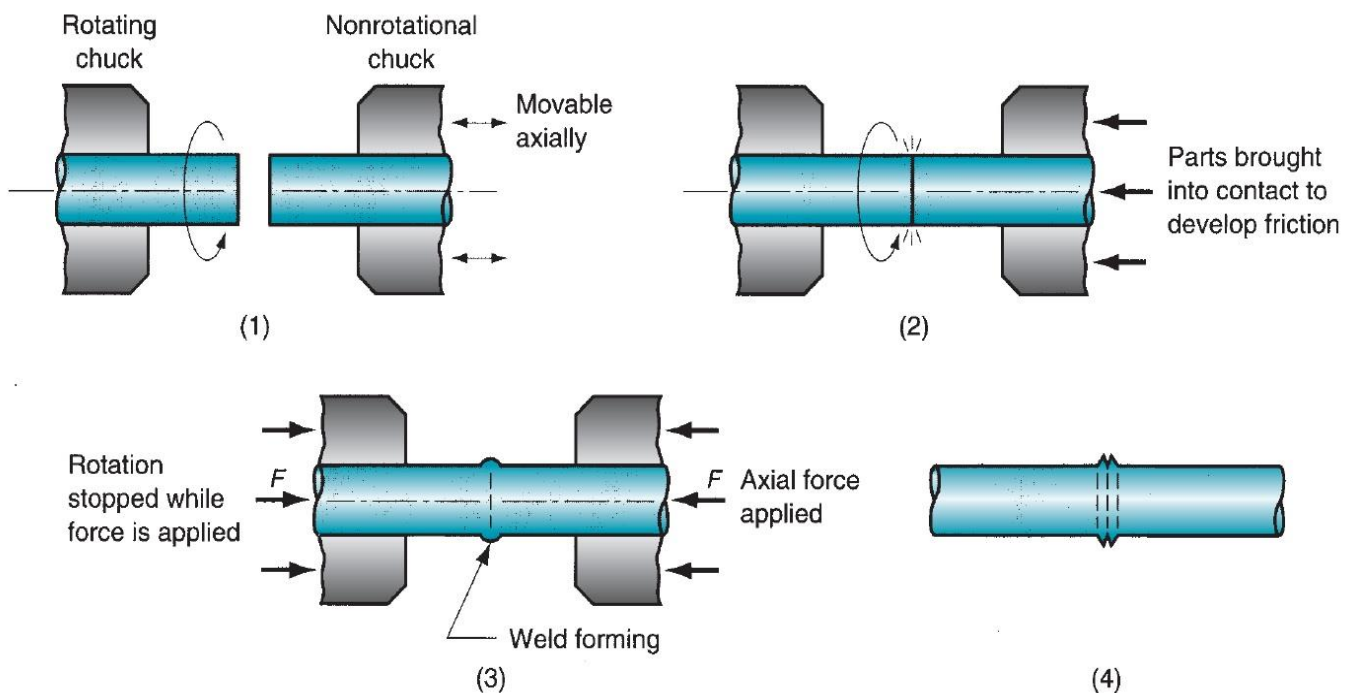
Friction welding (FRW): (1) rotating part, no contact; (2) parts brought into contact to generate friction heat; (3) rotation stopped and axial pressure applied; and (4) weld created.
